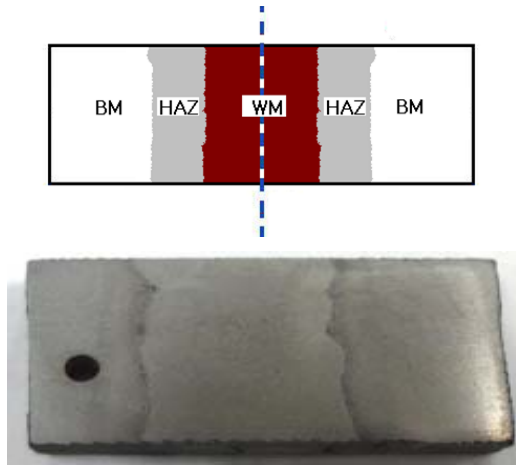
Photographs of the test specimen sample with base metal(BM), heat affected zone(HAZ) and weld metal(WM).
